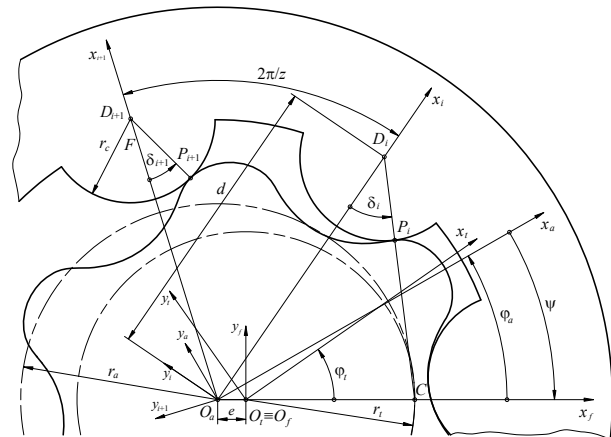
Schematic presentation of gear coupling at trochoidal pump with geometric dimensions
